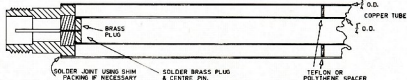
Assembly of Type N Connector to Copper Co-ax.
